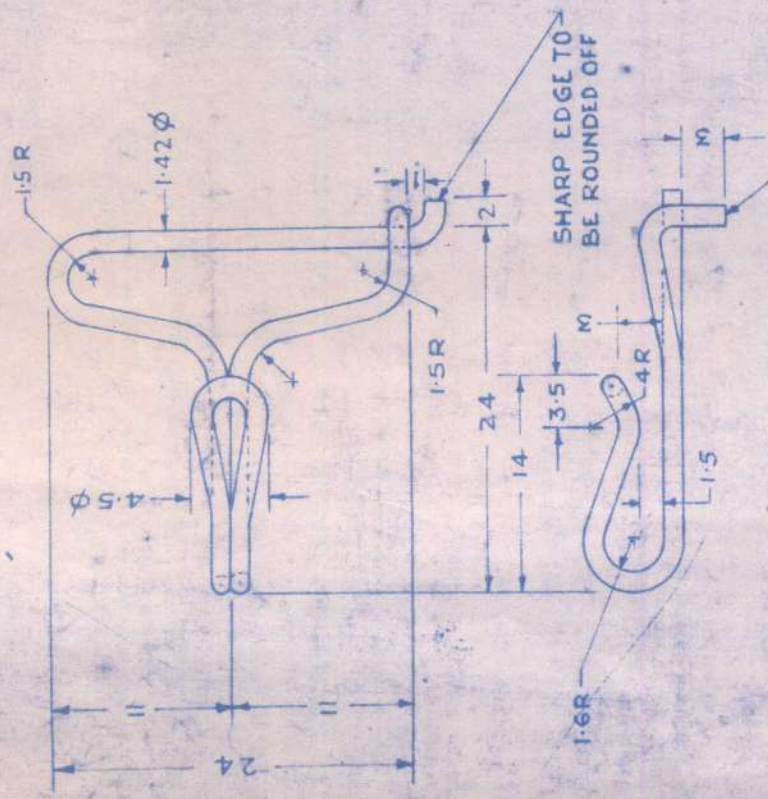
PLATE ATTACHED TO SPECN. NO. IND/43/1627(G)
